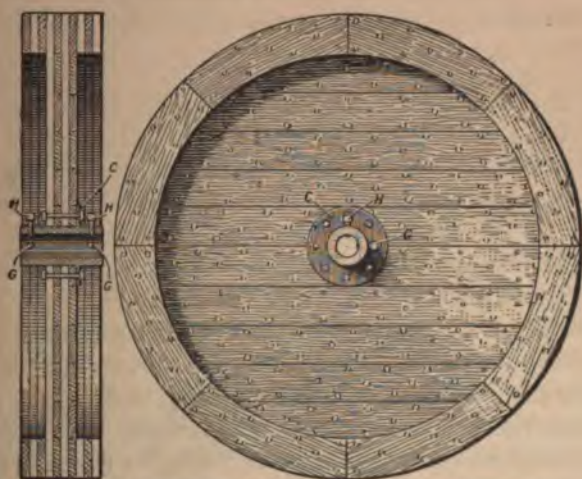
Sectional and Side Views of a Built-up Pulley.
